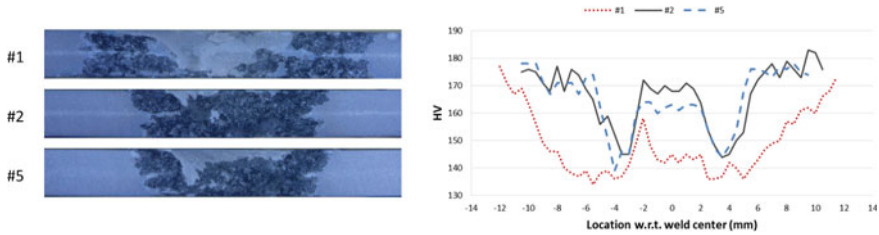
Left* optic image of the cross section of the three welds after corrosion test; *Right* the Vickers hardness profile across each weld on the center layer through thickness
